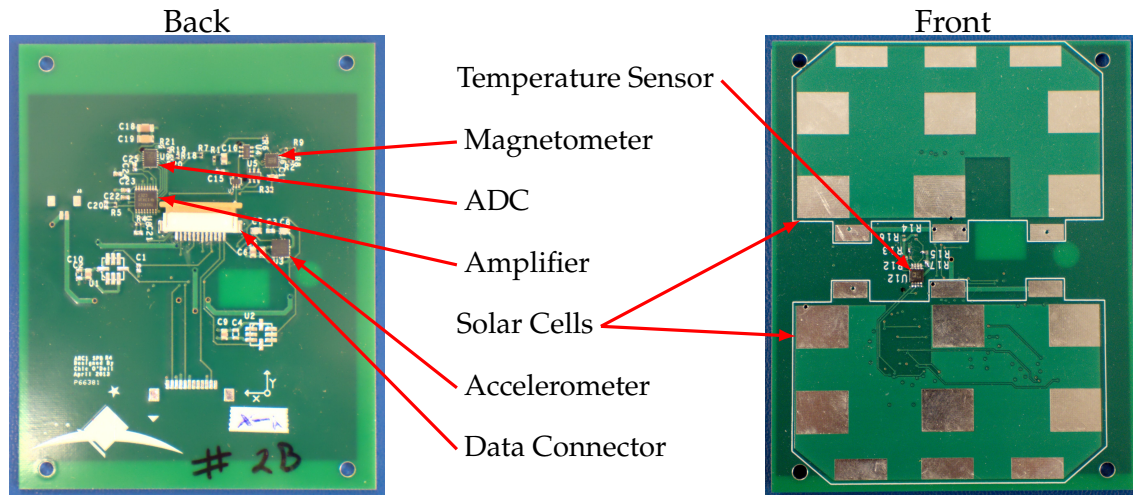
Back and front sides of the Solar Panel Board showing the magnetometer location.
